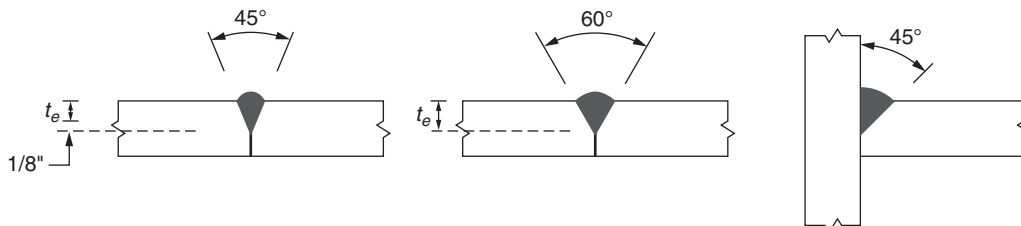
Partial joint penetration groove weld: SMAW.
